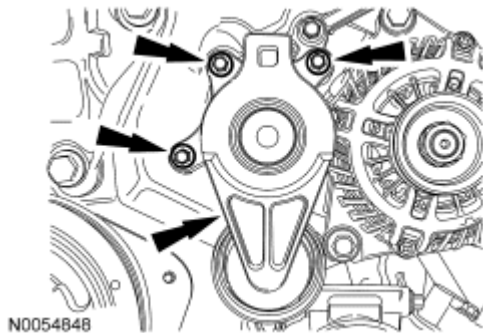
Locating Accessory Drive Belt Tensioner Bolts
